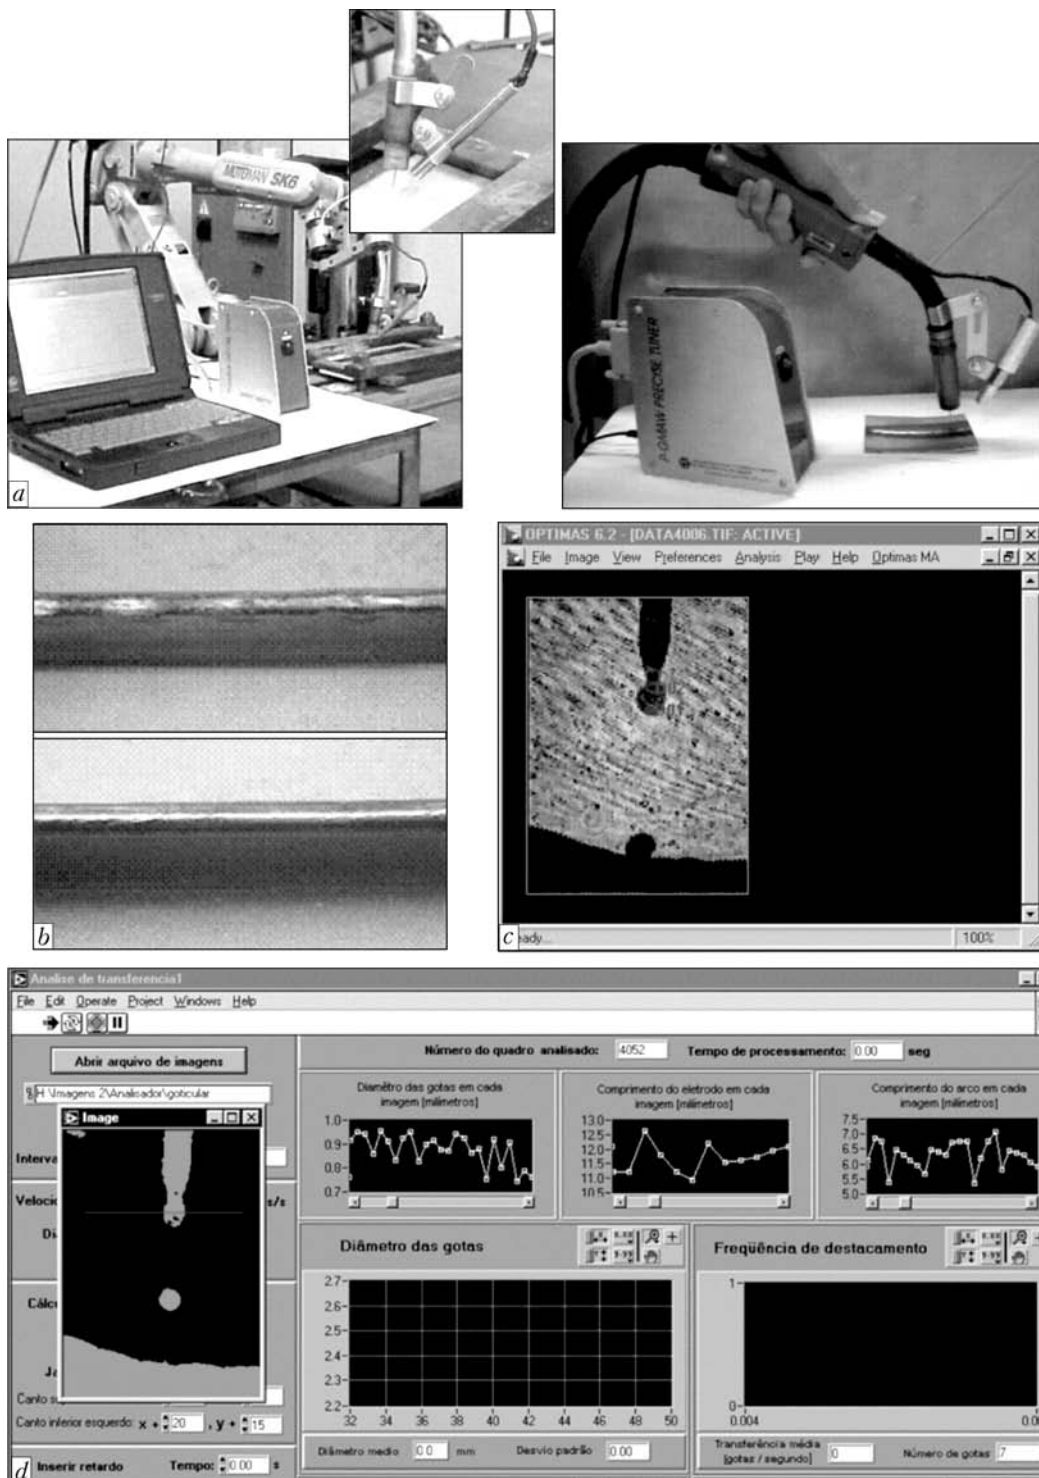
Monitoring (manual welding) and controlling (automatic welding) system for maintain one drop per pulse in pulsed MIG/MAG welding (White Martins) (a) b: upper — plasma melt-in weld using argon as plasma gas (travel speed of 600 mm/min), lower — similar weld, at same current, using the developed Stargold Flash gas (White Martins), with better finish and higher travel speed (2200 mm/min); a program for measuring dynamically the drop position, speed and acceleration (c); a program (Laprosolda) to measure drop frequency, size and arc length along the weld (d)
